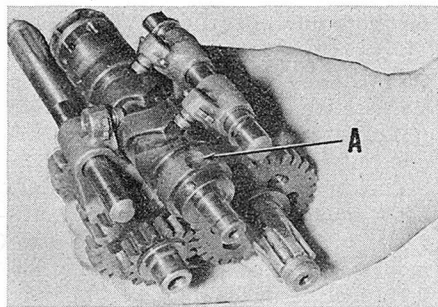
Transmission and shifter assembly ready for installation. Note position of shift stopper ball detent (A).
